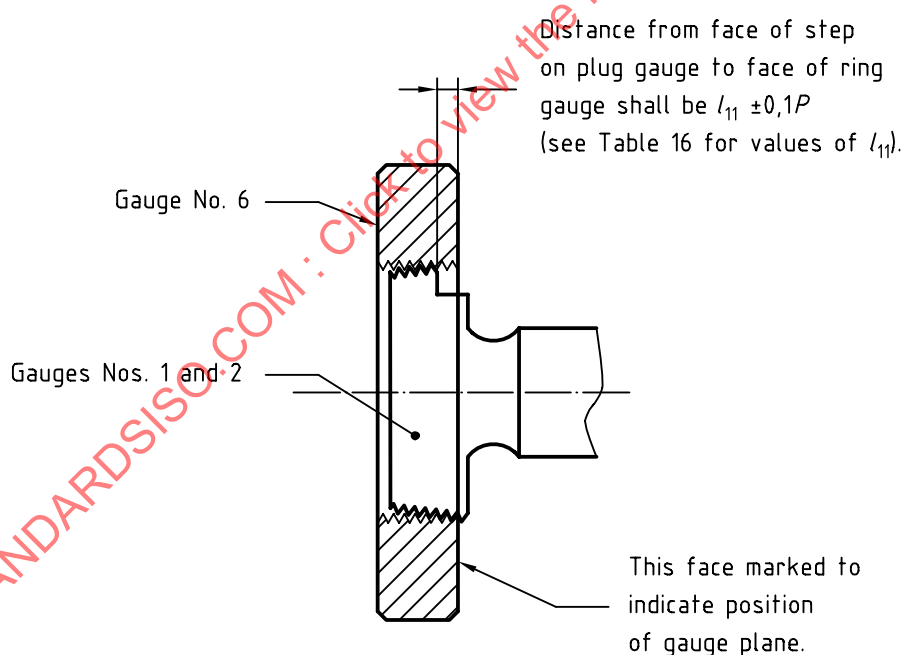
Checking of pitch diameter of new taper full form threaded plug gauges using parallel modified thread check ring gauge
